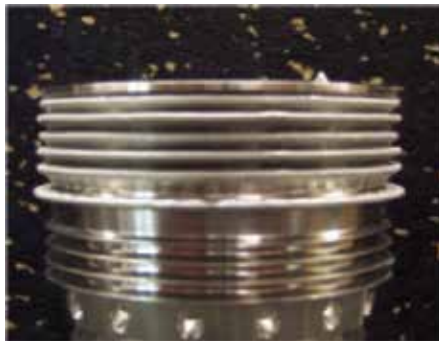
Laser repair technology of Inconel 718 compressor seal [17].
